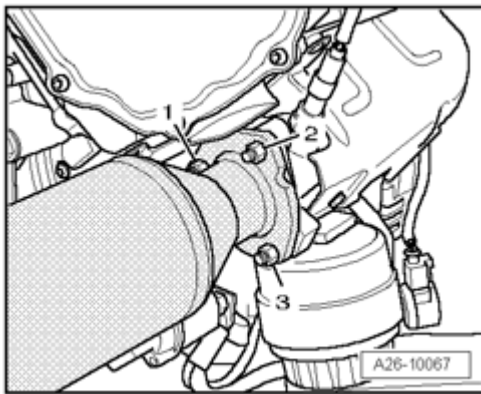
Removing Nuts & Right Front Exhaust Pipe With Catalytic Converter
